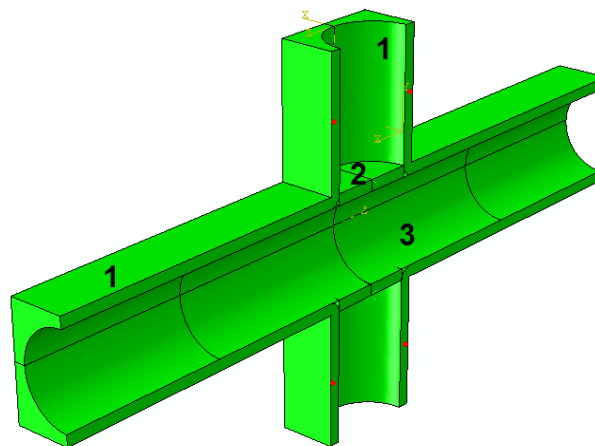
Major parts of model: 1- die 2- rigid body 3-tube
